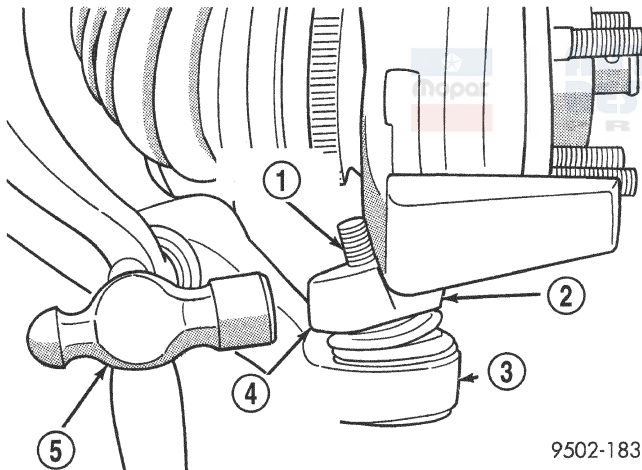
Lower Ball Joint to Steering Knuckle Attachment
